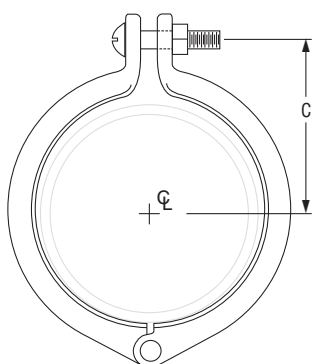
Loads (lbs) • Weight (lbs) • Dimensions (in)
